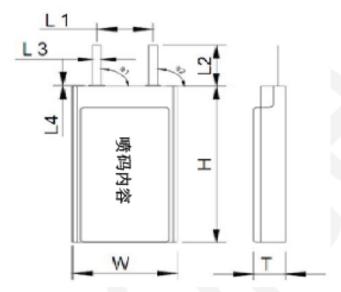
The Dimension of Cell 图 (1) 单体电池外形尺寸图
